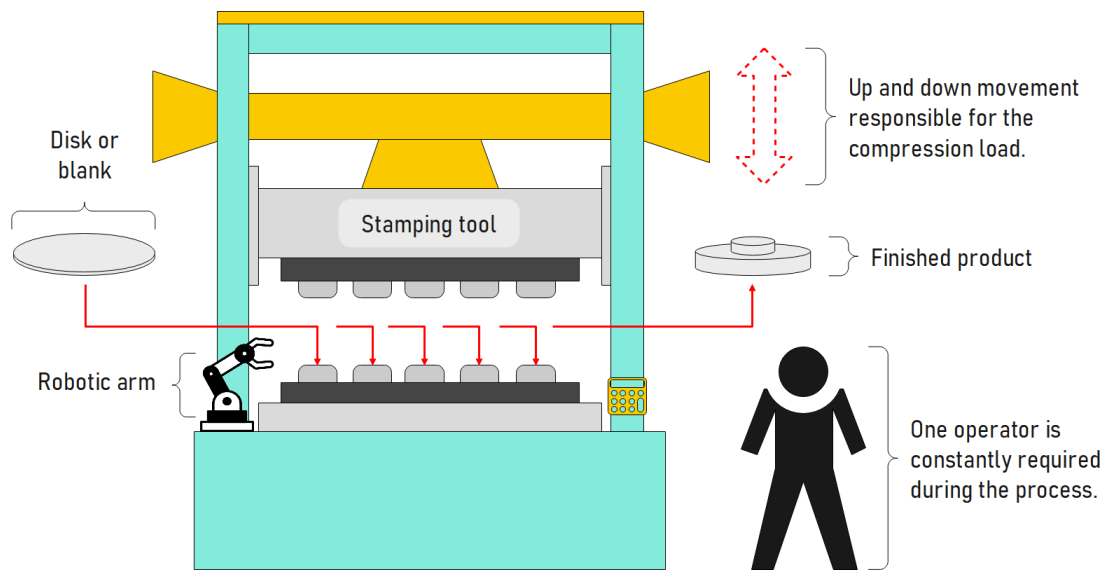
Working principle of a progressive stamping hydraulic press[39]
